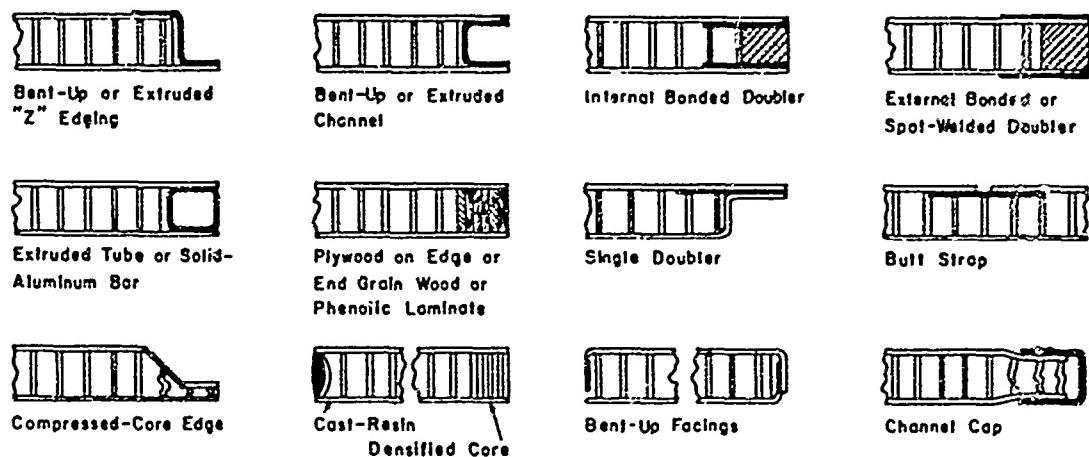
HONEYCOMB-PANEL EDGE DESIGNS (REF. 32)
